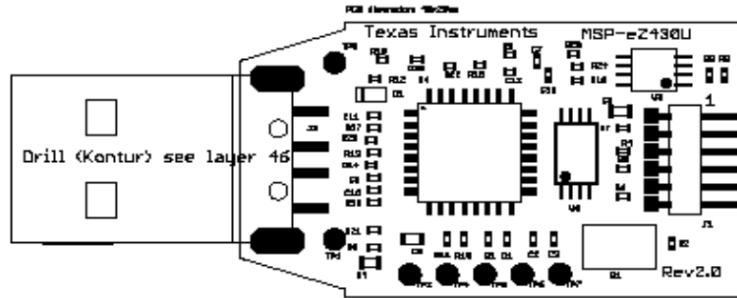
eZ430-RF, USB Debugger, PCB Components Layout
